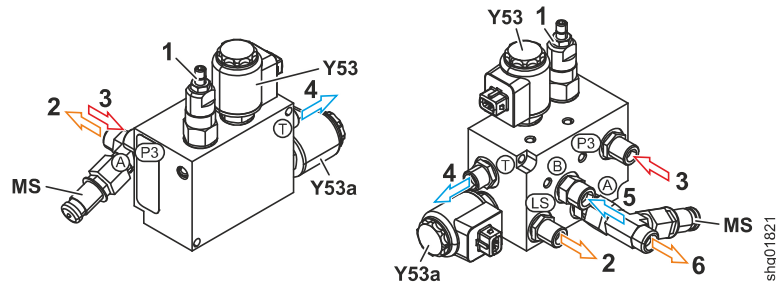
Valve block for quick coupler (from front left and from rear right)
